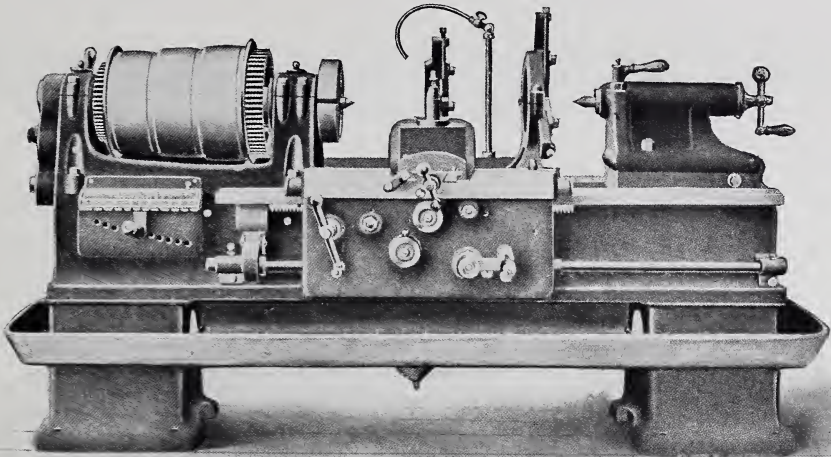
A HIGH-SPEED LATHE, MADE BY THE AMERICAN TOOL WORKS CO., CINCINNATI, OHIO, U. S. A.
